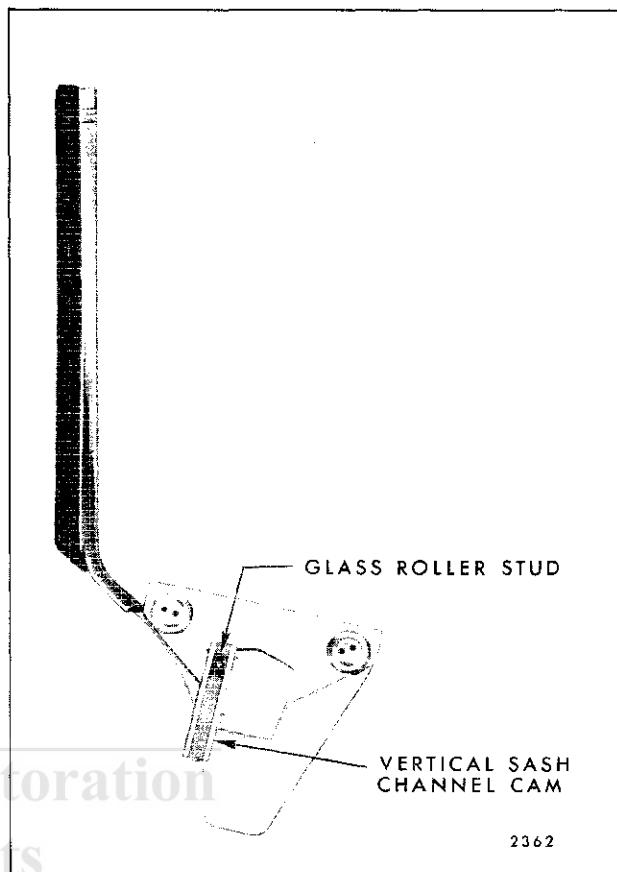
Rear Quarter Window Assembly - "E-47" Styles
